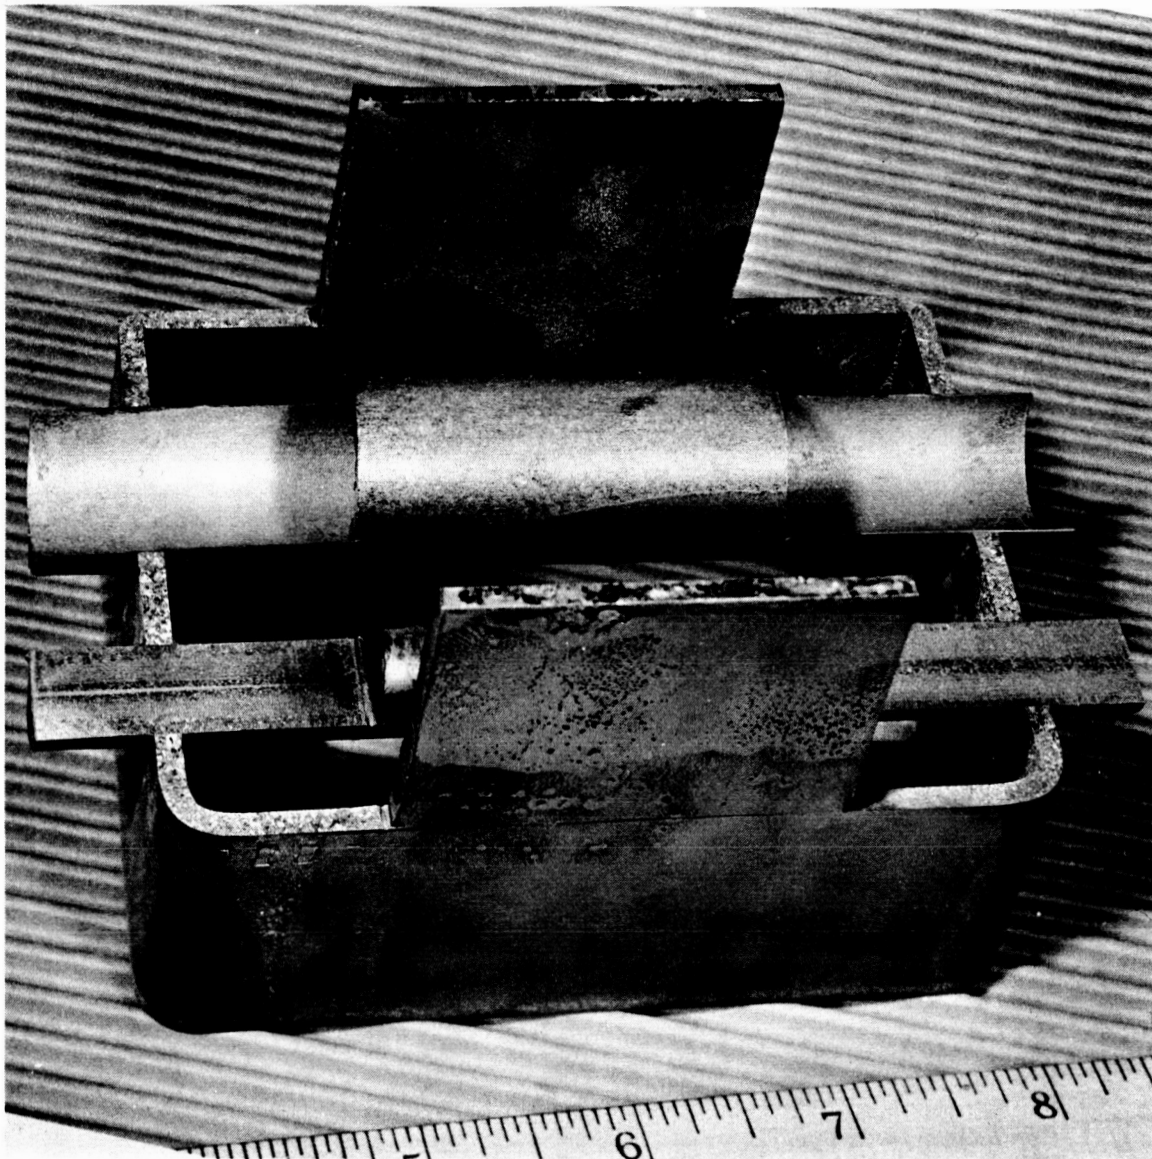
Sectioned Mock-Up Specimen of L-605 Bar and Tube Brazed to a Type 316 SS Frame with H-33 Brazing Alloy
